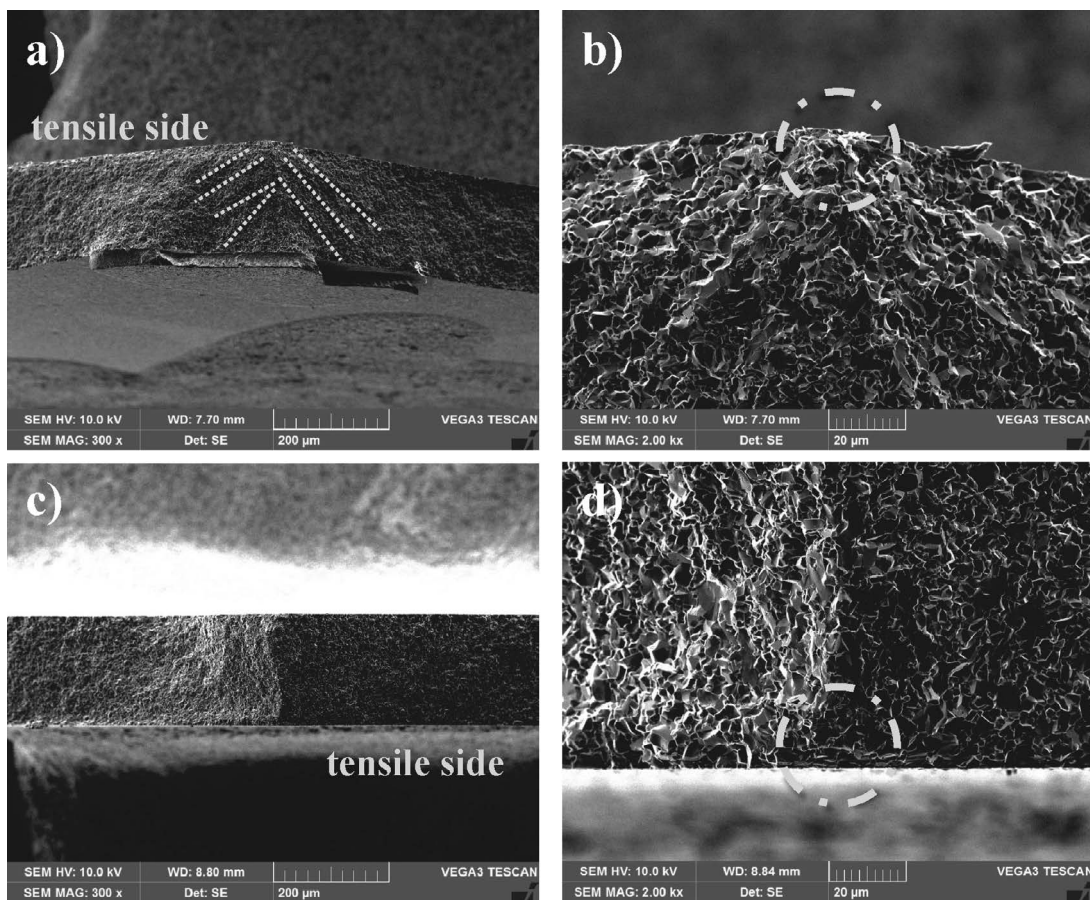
Fracture surface of the sample C-29 showing possible fracture origin (grey dash-dot line).
